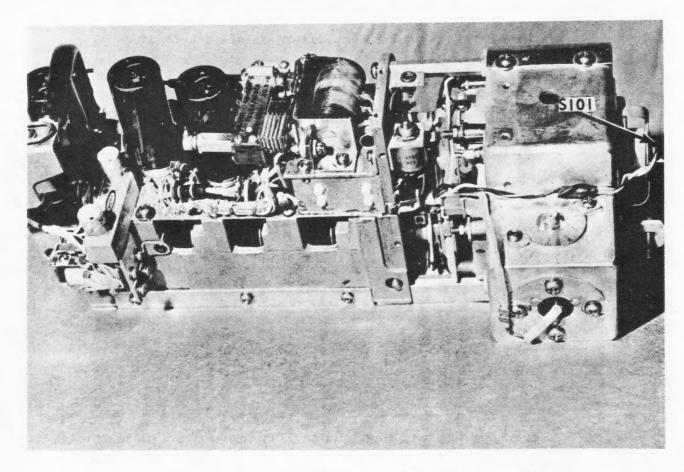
RF and PA Amplifier Assembly, Side View Showing Thermal Sensor
